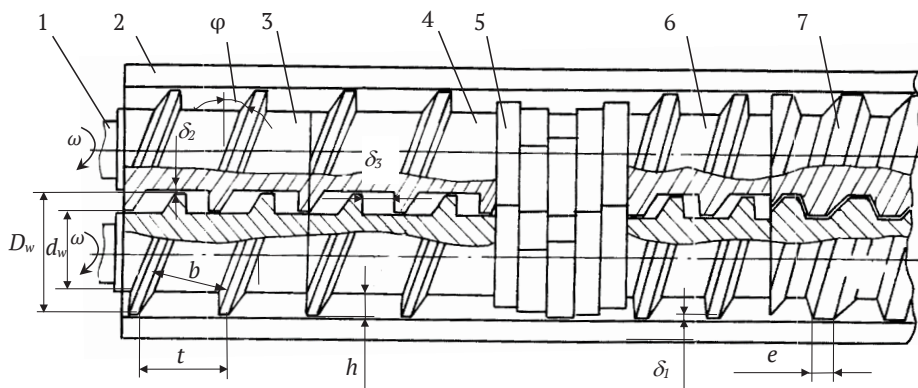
Geometry of the screw channel of a twin screw extrusion press: 1 – shaft; 2 – case; 3, 4, 6, 7 – screw nozzles; 5 – triangular cam nozzles
